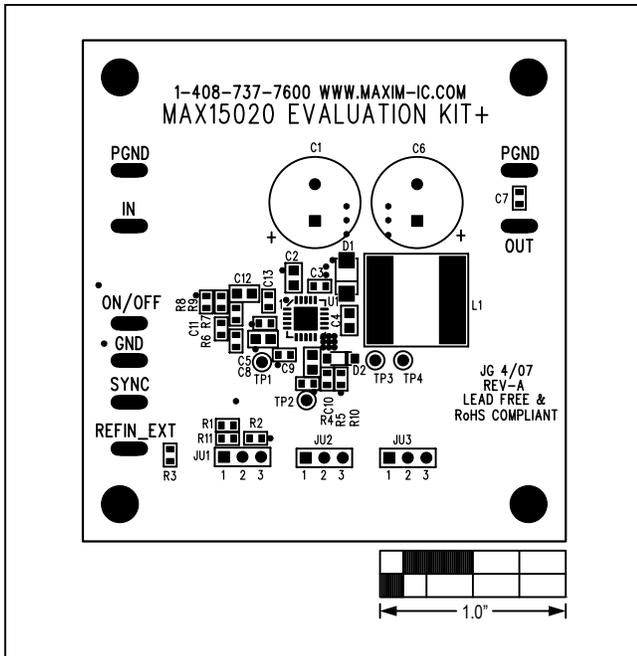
MAX15020 EV Kit Component Placement Guide—Component Side
